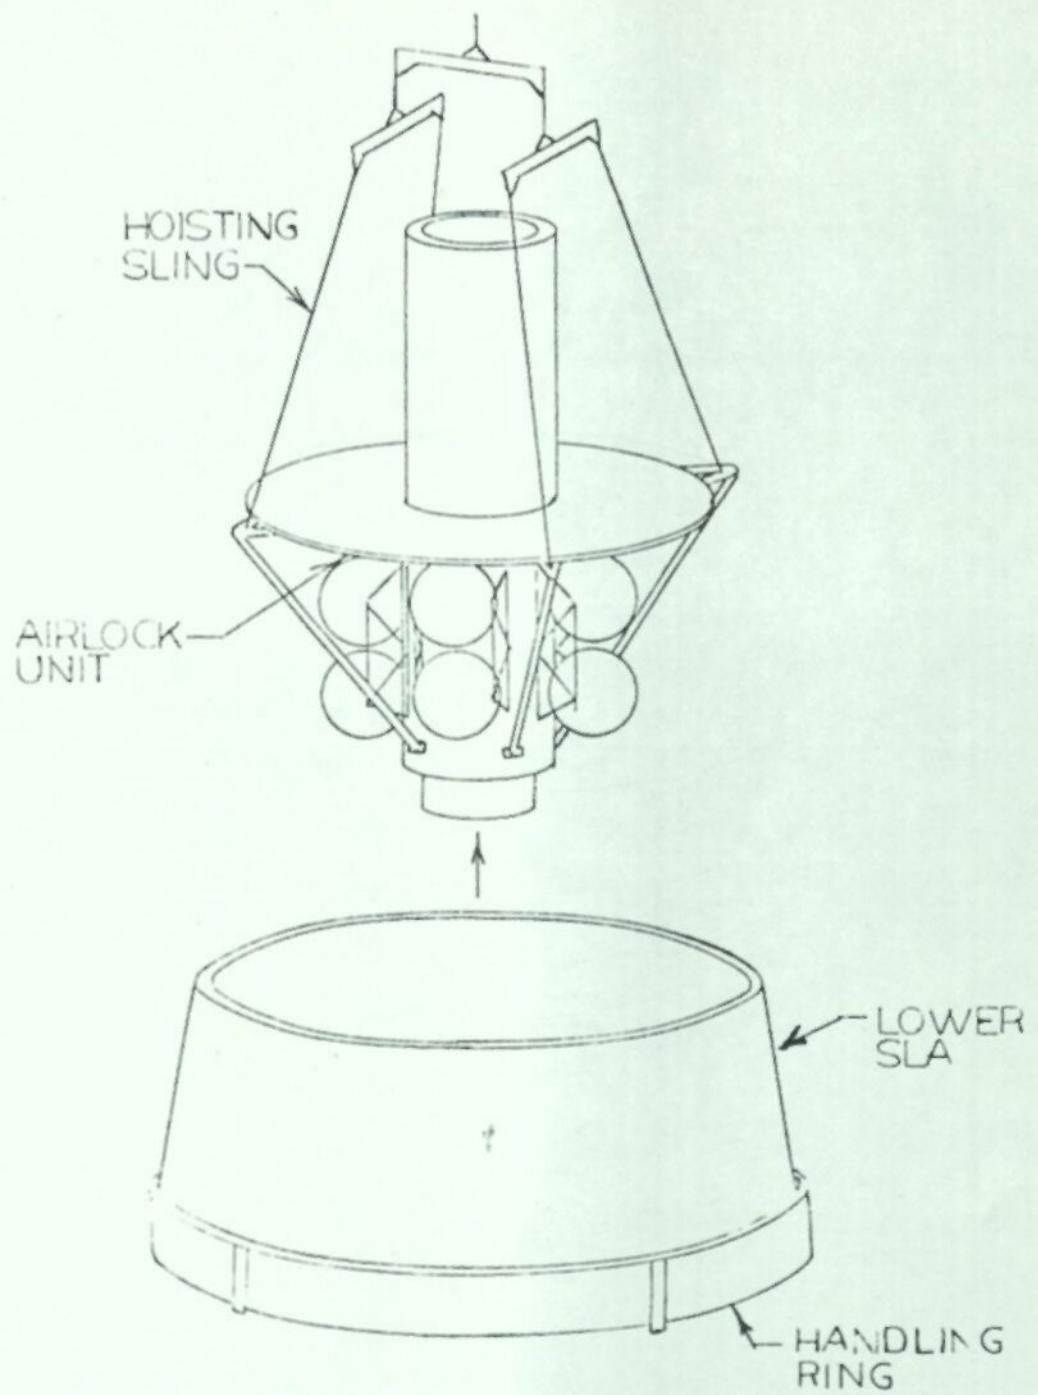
SSESM REMOVAL FOR FURTHER TESTING OF LOWER SLA
